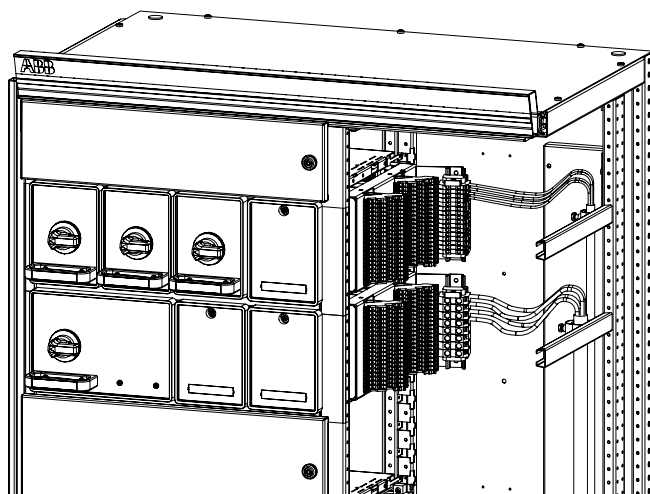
Example of cable runs, withdrawable module size 8E/4 and 8E/2
